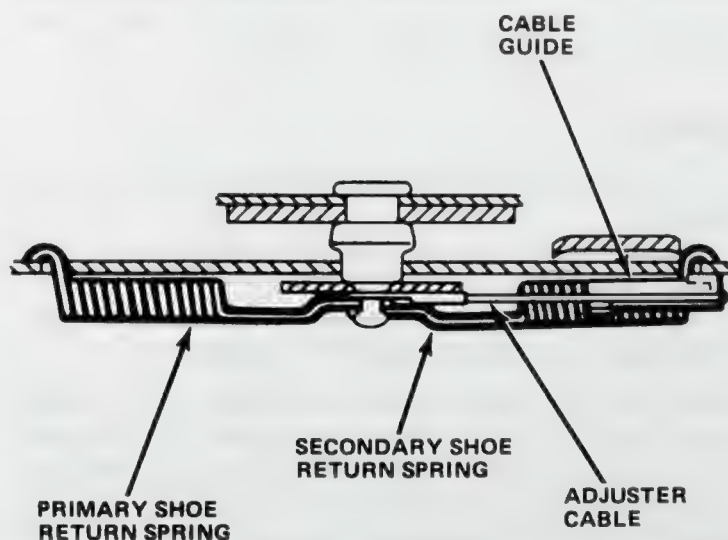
F-44 Adjuster Cable and Return Spring Installation—10-Inch Brake
